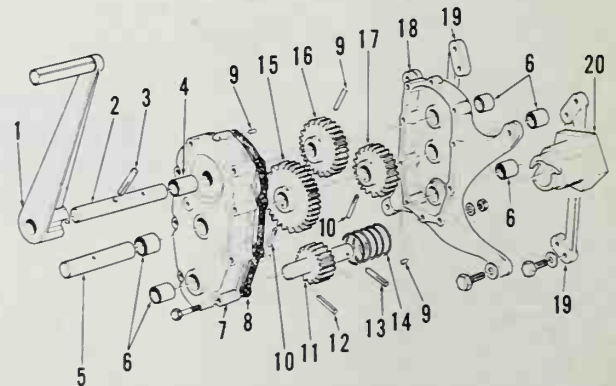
Exploded view of crank type manual starter used on some models. Adapter (19) is used on Models WD1-660, WD1-670 and WD1-750.
